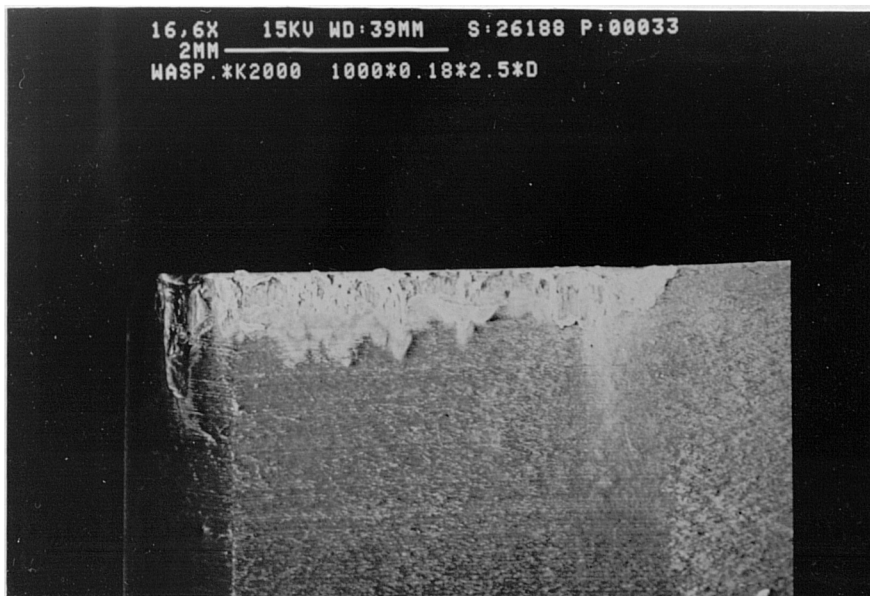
Flank wear of Kyon 2000 used to machine Waspaloy (V=300m/min, F=0.18mm/rev, DOC=2.5mm, Dry)
